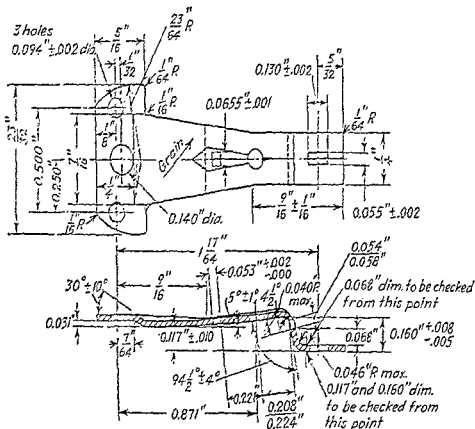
Blanked and formed contact arm. (White-Rodgers Electric Co.)
